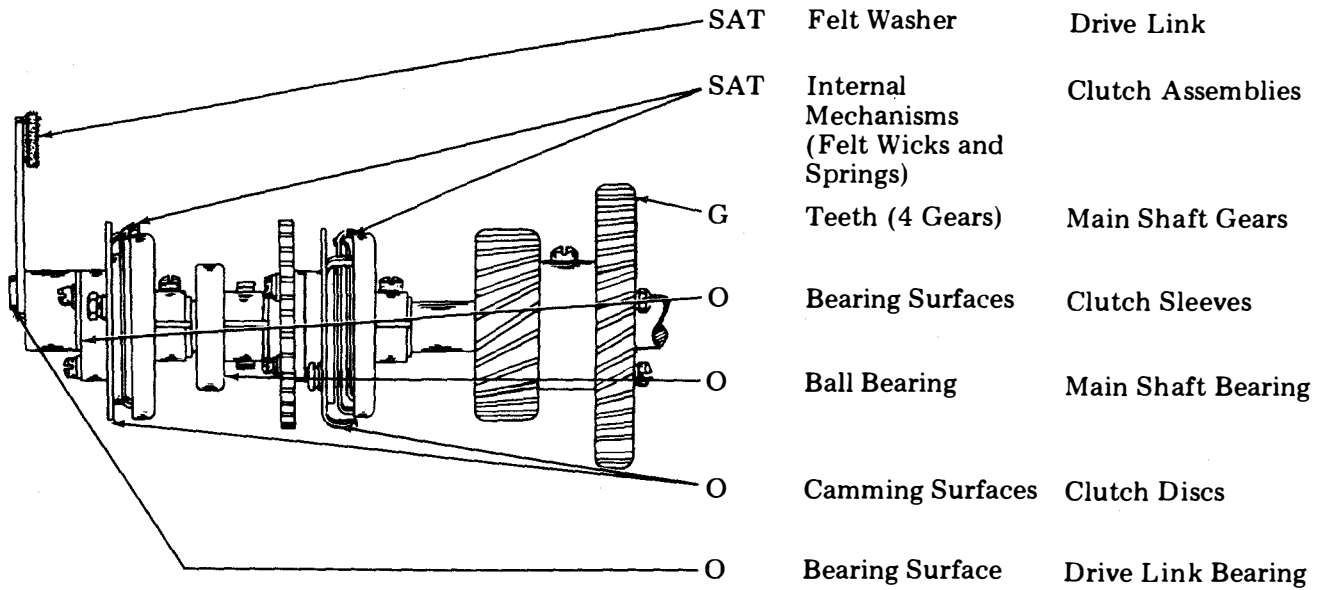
Main Shaft - Clutches and Gears, Bottom View
